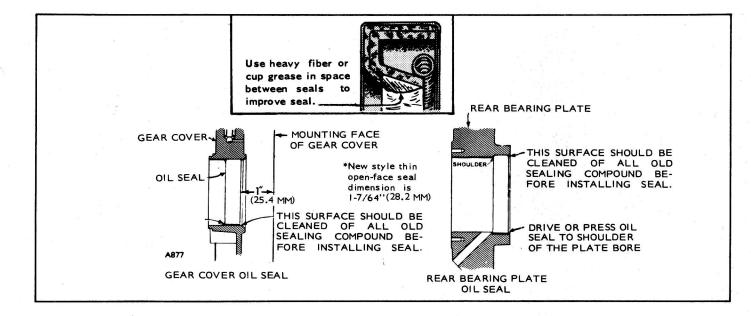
GEAR COVER AND REAR BEARING PLATE OIL SEALS
